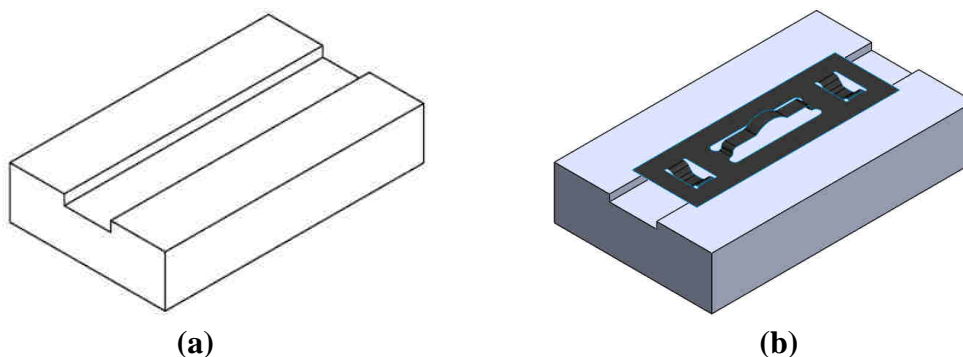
Device to hold the specimen: (a) support for the strap - spring; (b) support with the strap - spring.
